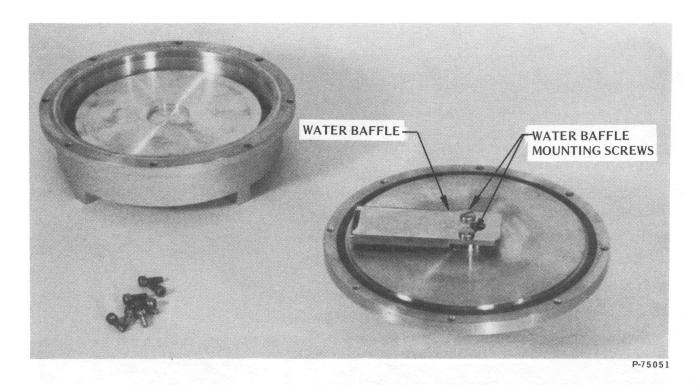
Using a blunt or wooden instrument, remove the o-ring from its groove. Be careful not to score it. Unscrew the water baffle mounting screws and lift the water baffle off the pivot shaft.
